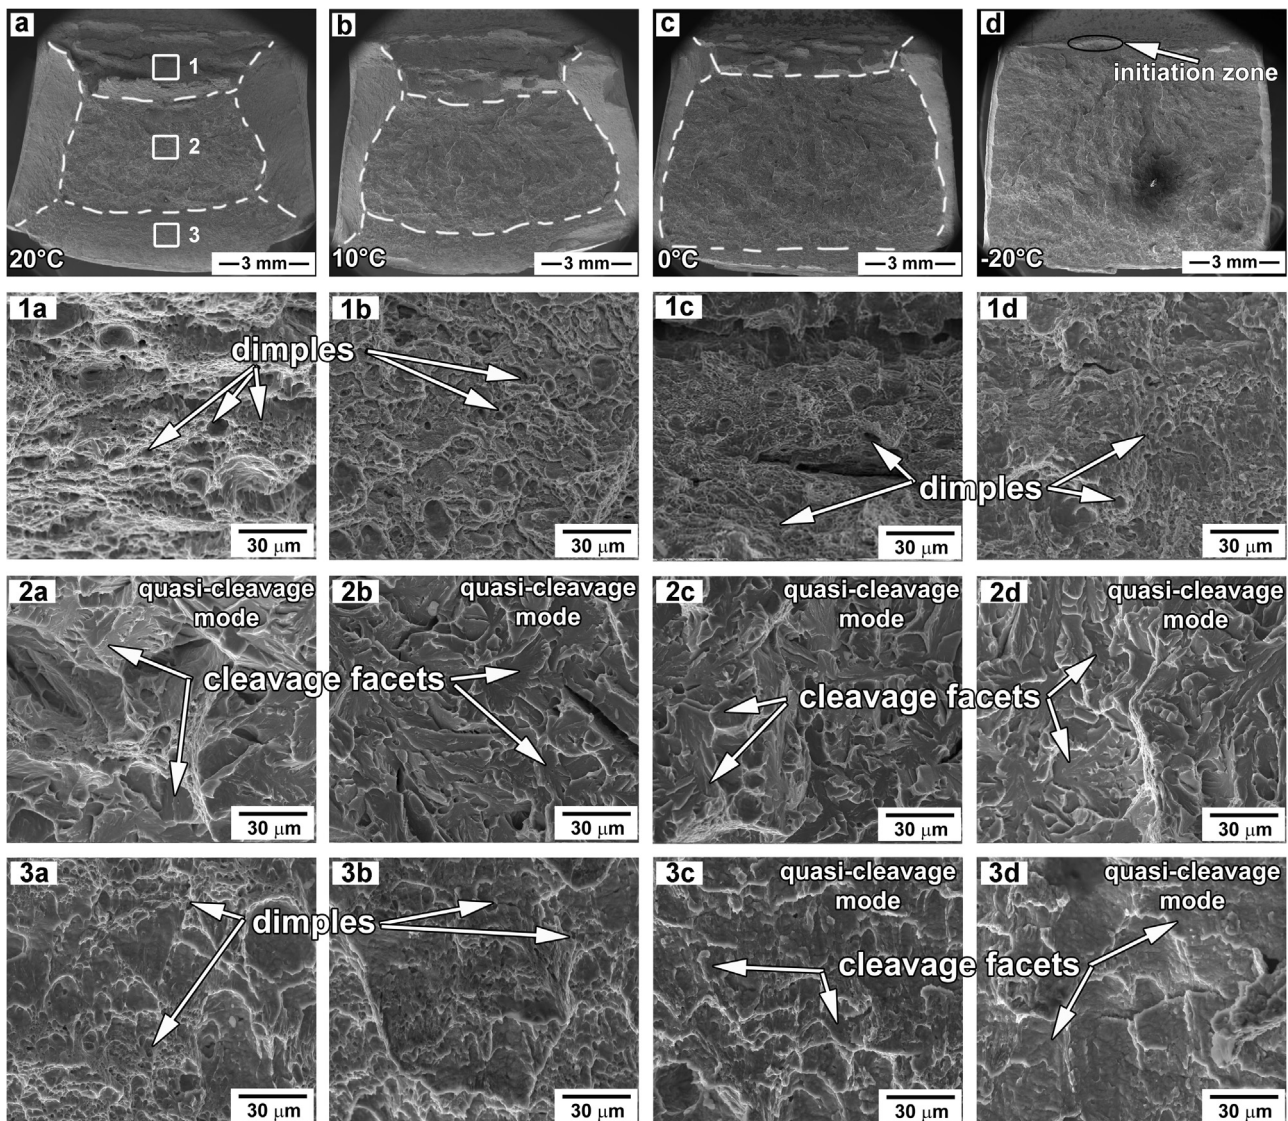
Macrographs showing low-magnification general view (a-d) of the fracture surface in the Charpy V-notch specimens tested at 20°C (a); 10°C (b); 0°C (c); -20°C (d). SEM (secondary electron) fractographs showing high-magnification view of the crack initiation/stable crack propagation zone (1a-1d); (center) the unstable crack propagation zone (2a-2d), and the shear-lip zone (3a-3d).
